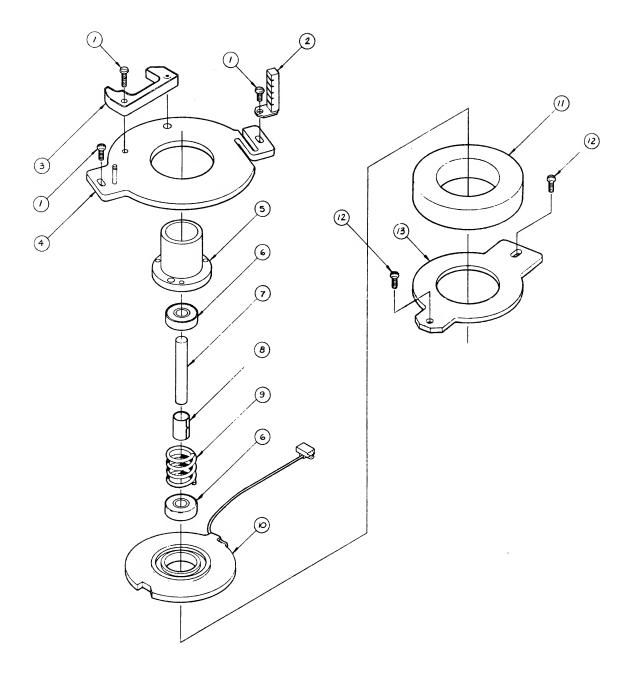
ACTUATOR SUB-ASSEMBLY
